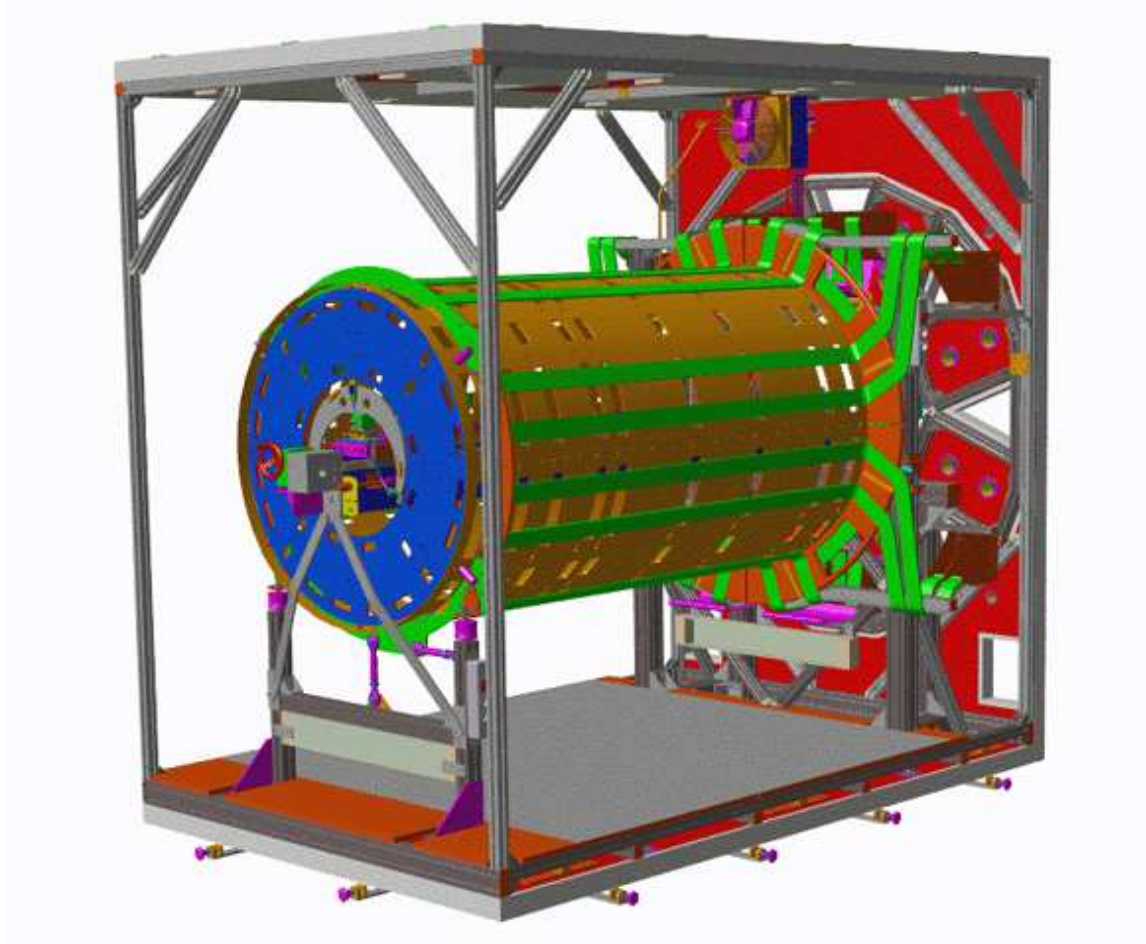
The assembly tooling and test frame, with the Endcap completed; the side panels which will be present during transport have been removed.
